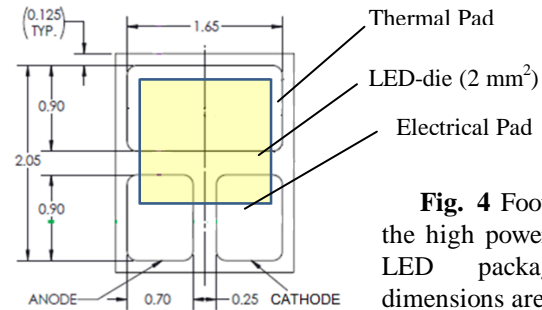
Foot print of the high power ceramic LED package (all dimensions are in mm).
